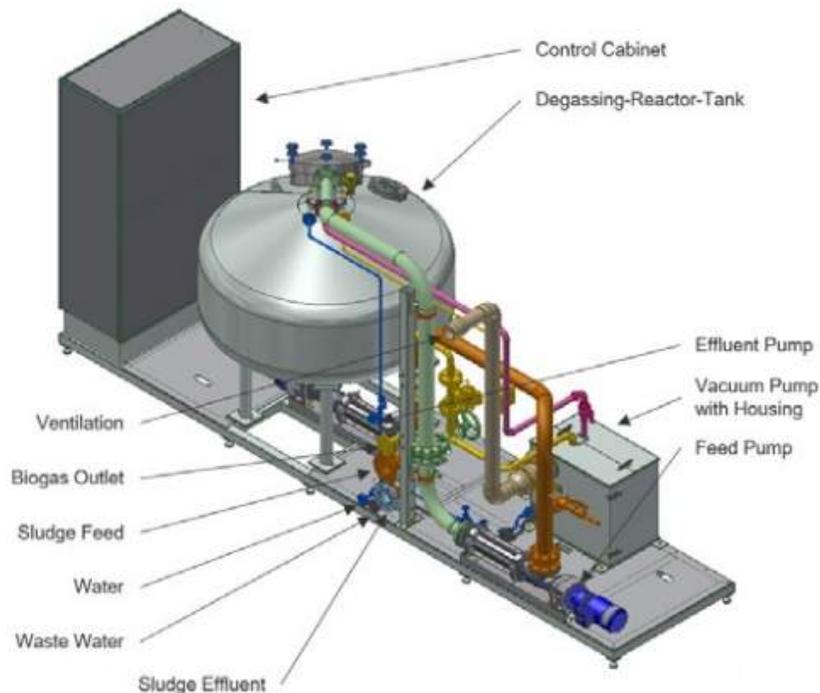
Typical Equipment Layout of the Ovivo EloVac System
